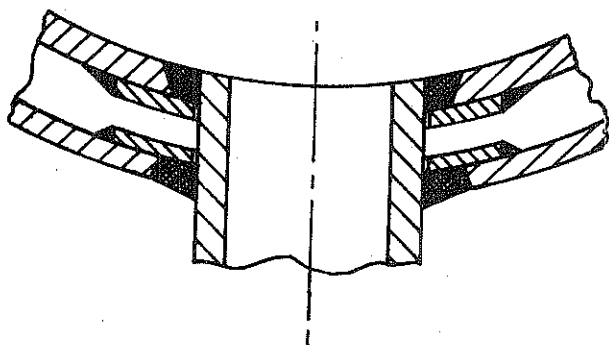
Bottom outlet pipe with separate reinforcements for head and jacket
